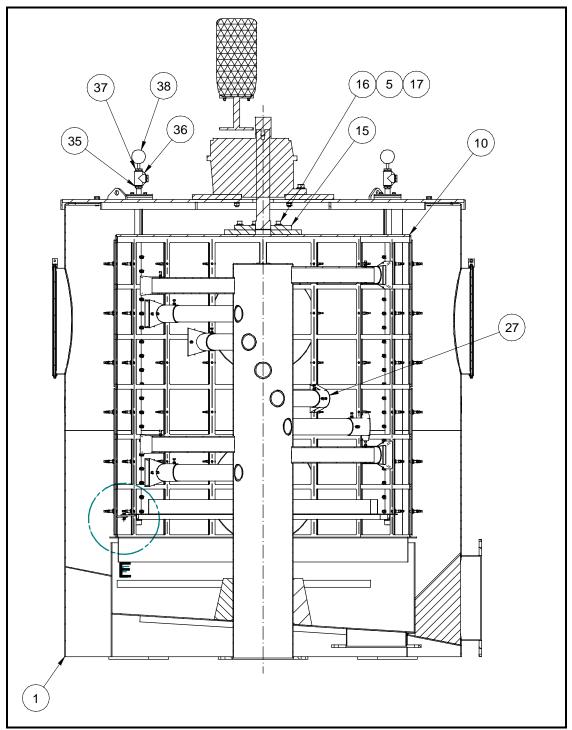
Final Assembly, Section A-A, WWF60-6L (Per Figure 4-14)
